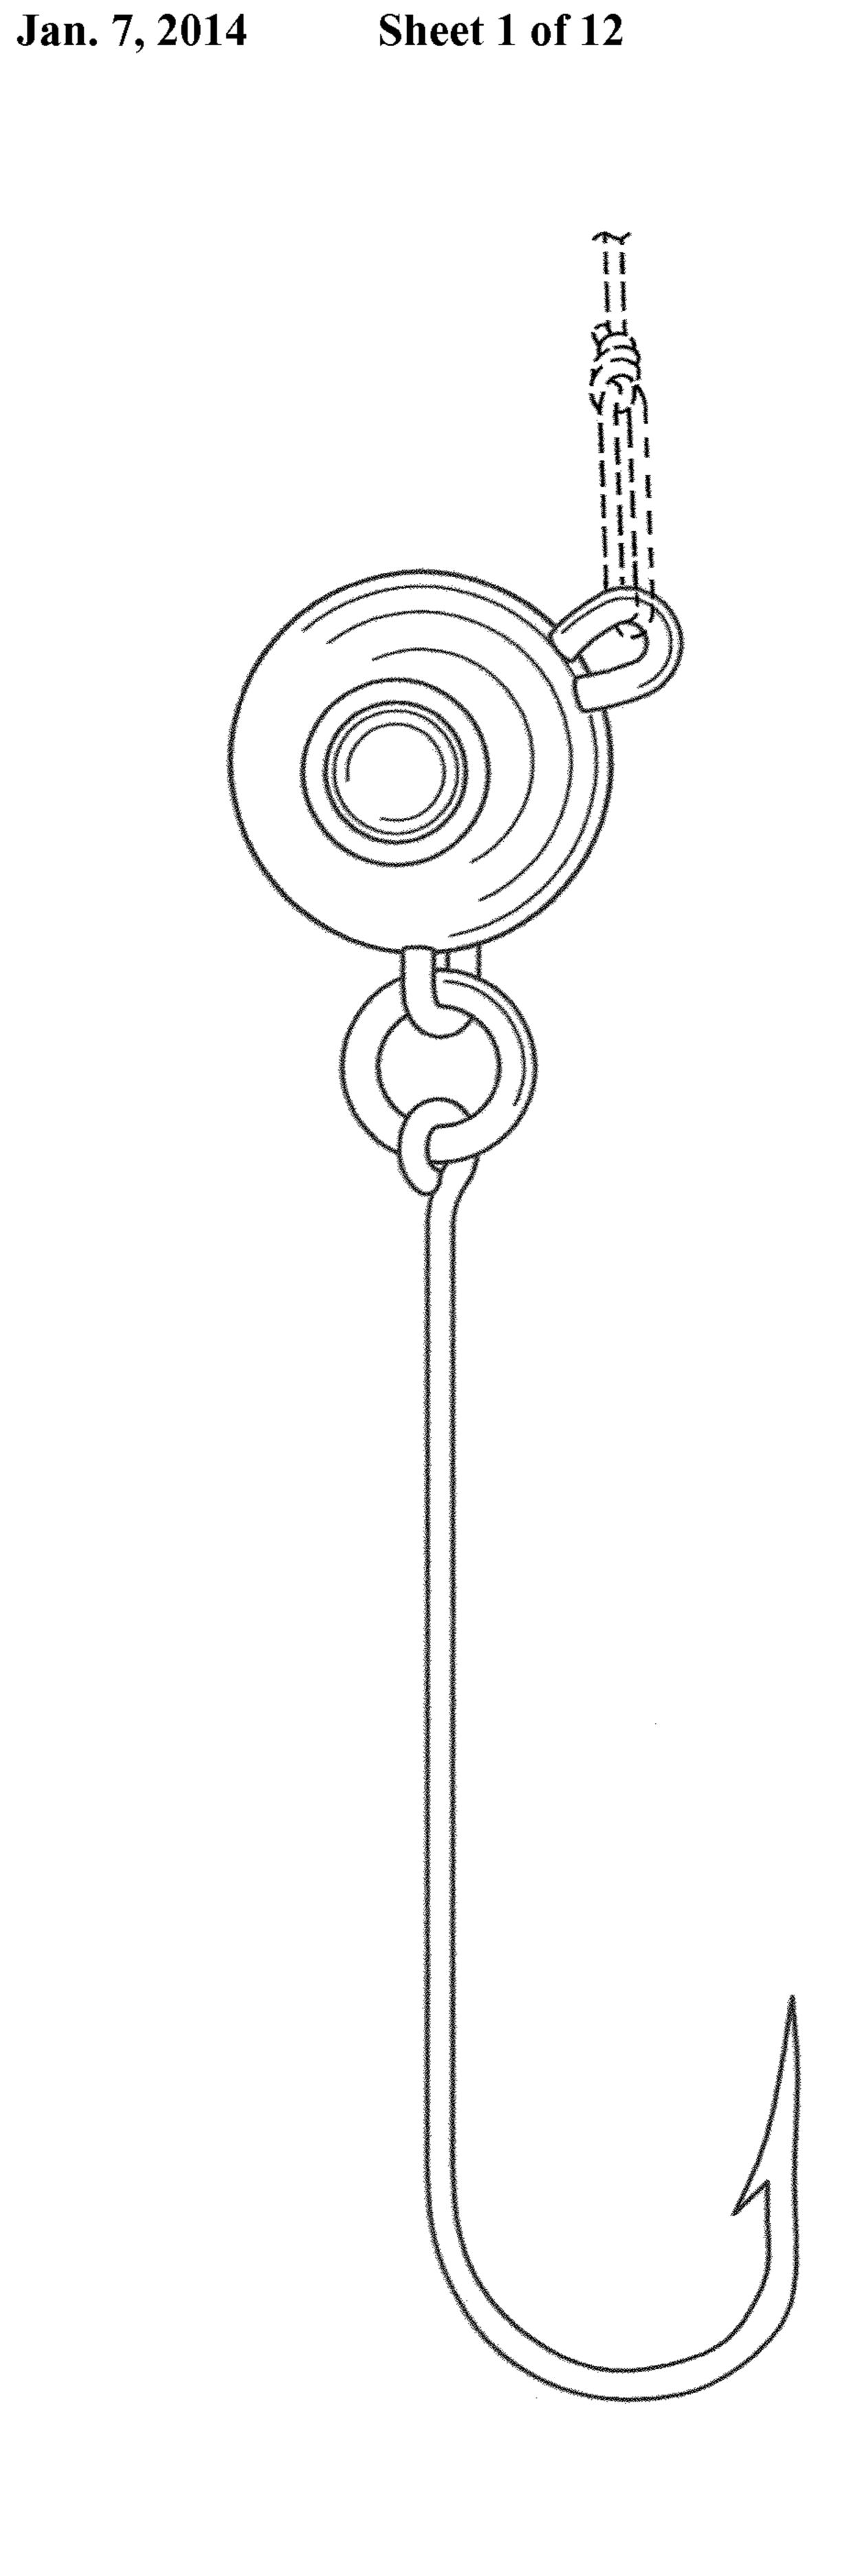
is a right side view of a jig fishing lure, with a barbed hook and jighead connected with a swivel and ring assembly; FIG. 18 is a front view of a jig fishing lure, with a barbed hook and jighead connected with a swivel and ring assembly;
